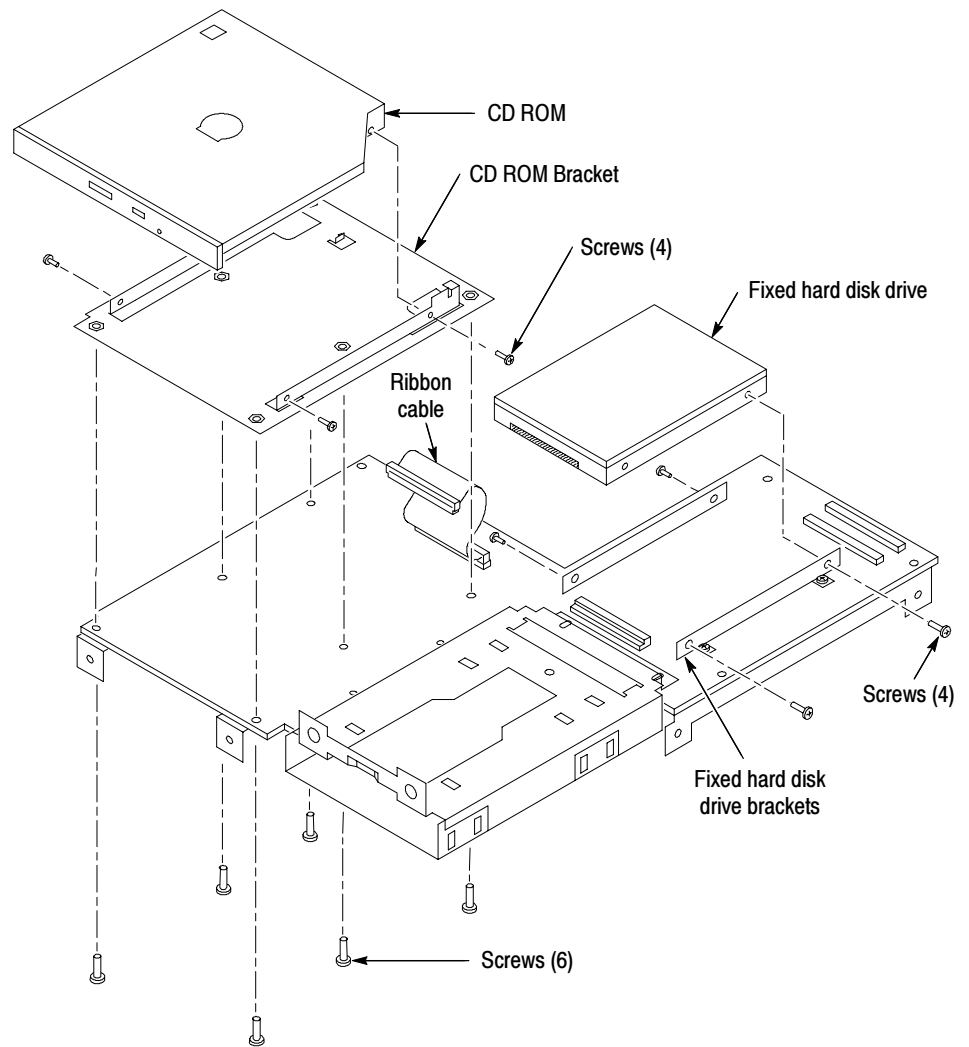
Removing and installing the fixed hard disk drive and CD-ROM drive
